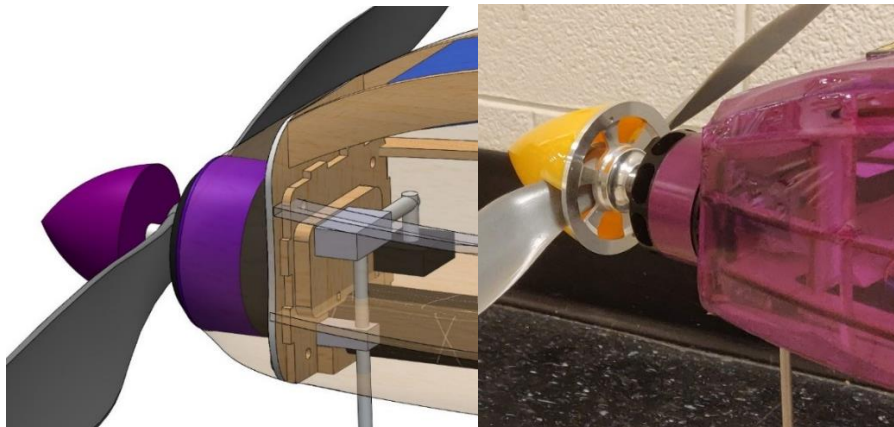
CAD motor mount assembly (left) and real motor mount (right)
